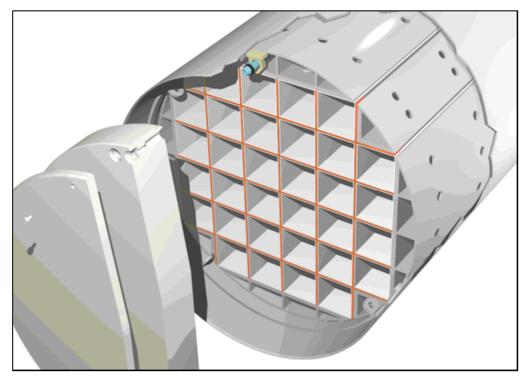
Schematic cutaway of the DSC-32PTH manufactured by Transnuclear, an example of egg-crate basket design
